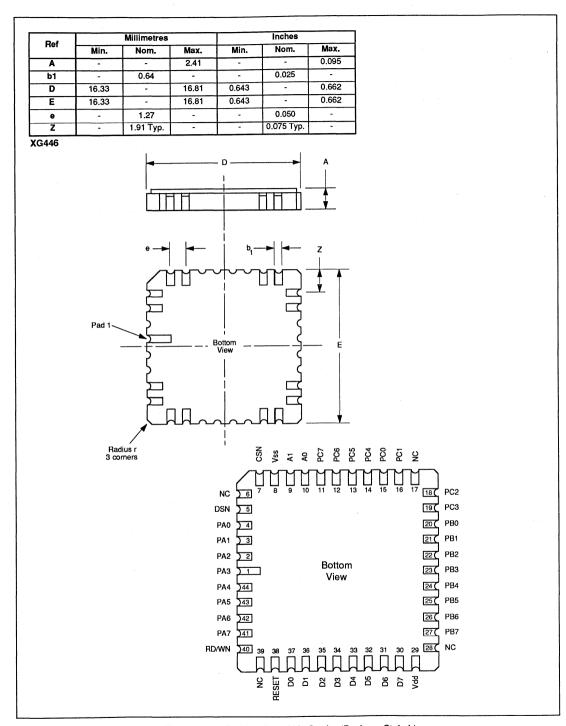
44-Pad Leadless Chip Carrier (Package Style L)
